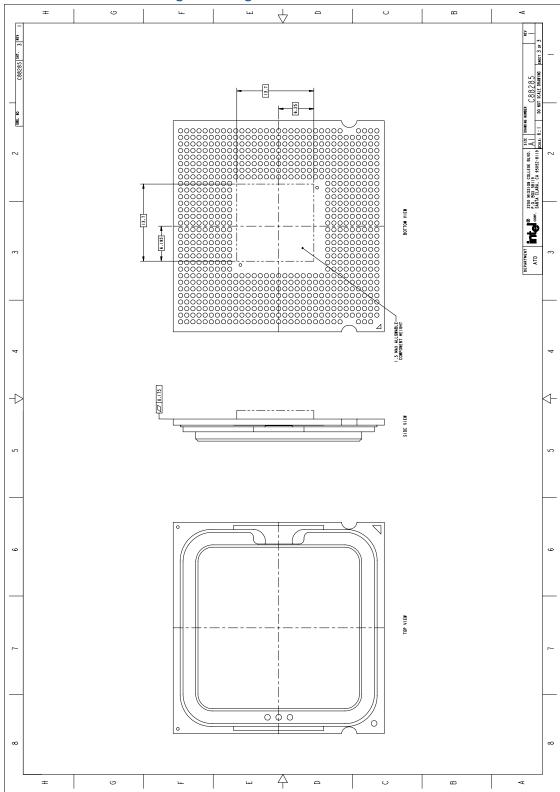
Processor Package Drawing Sheet 3 of 3
